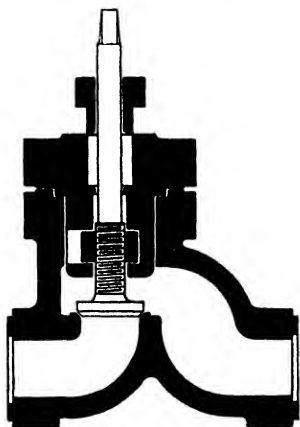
Hydraulic Stop Valve, Unbalanced Type.
